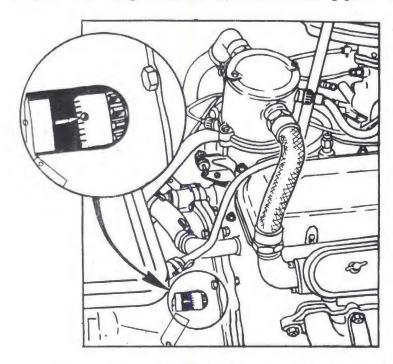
SETTING THE PISTON OF THE 1st CYLINDER IN TDC
